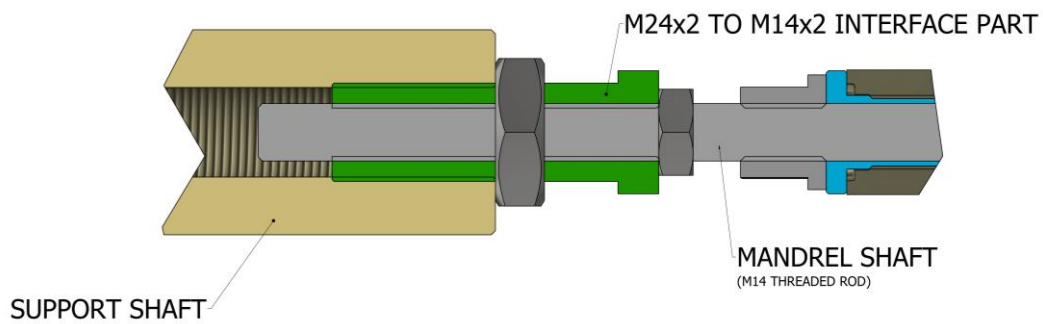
Scheme in detail of the mandrel rod assembly in the support shaft.
